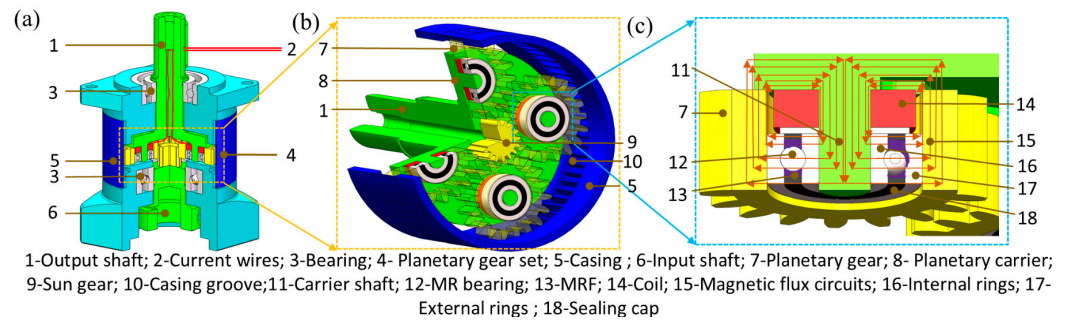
3D Model of the MR gearbox. (a) full layout; (b) planetary gear set; (c) section view.
